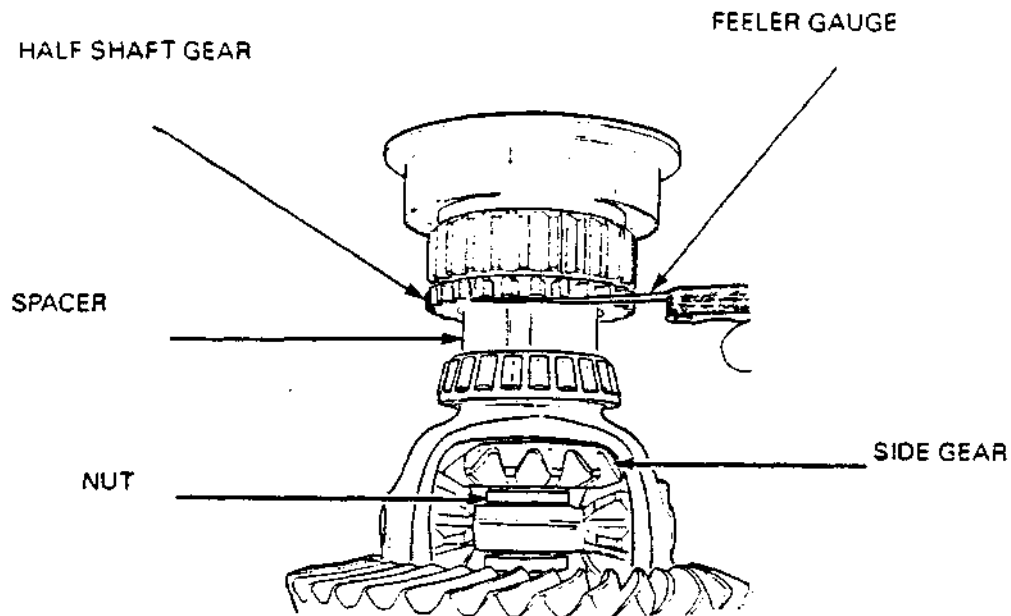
Measurement of Gap Between Half Shaft Gear and Spacer
